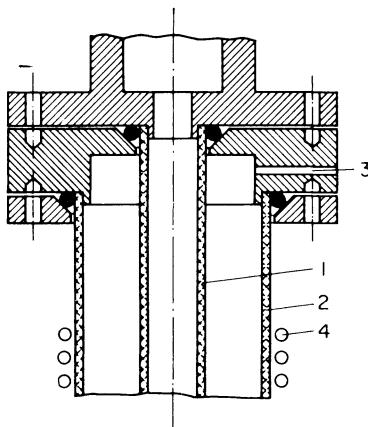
Conical O-ring seals on a water-cooled double walled vacuum chamber:
